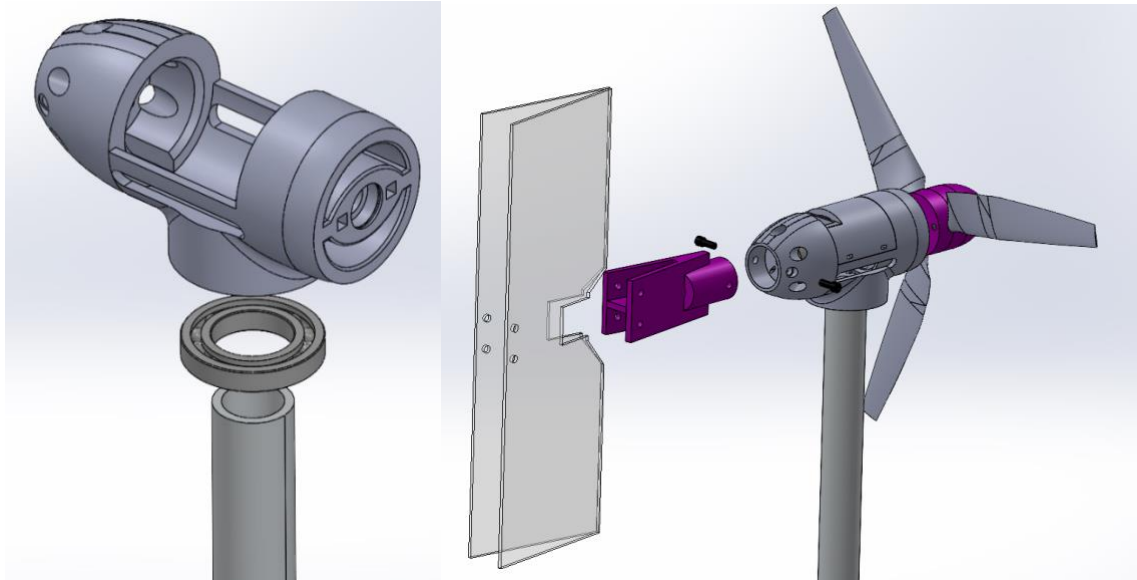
Left – Yaw bearing assembly, Right – Tail assembly
